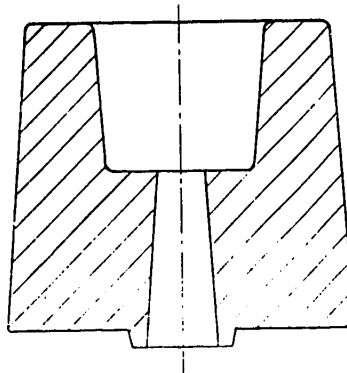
Fireclay core (insert) for bottom of mold, used in casting 5-ton ingots
